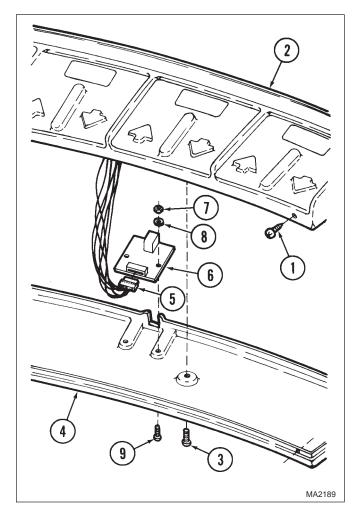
Foot Control Assembly Control Interface Board Removal / Installation
